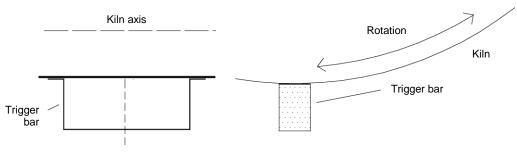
Welding the Trigger Bar on the Kiln
